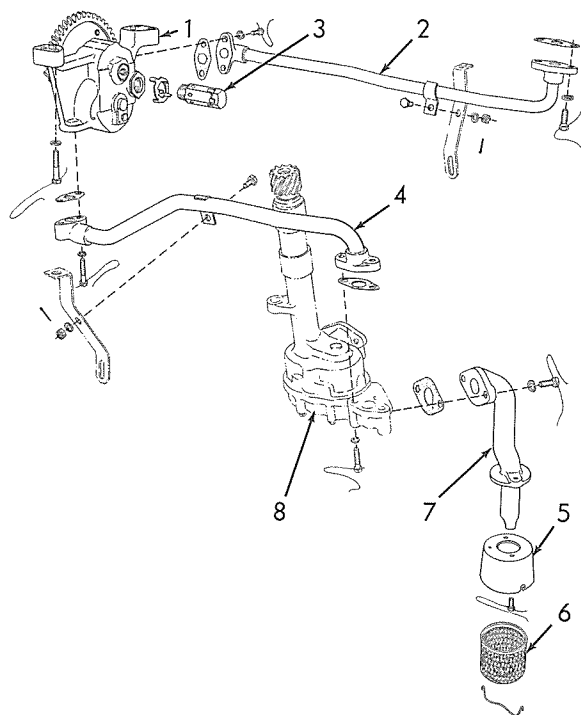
Tubing Arrangement (Track-Type Tractors Only) (T-13181)
